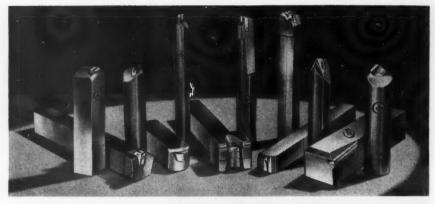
Diamonds Can Be Mounted in Shanks in a Wide Range of Designs, as Shown by this Representative Selection of Diamond Tools made by F. F. Gilmore & Co., Boston, Mass.
